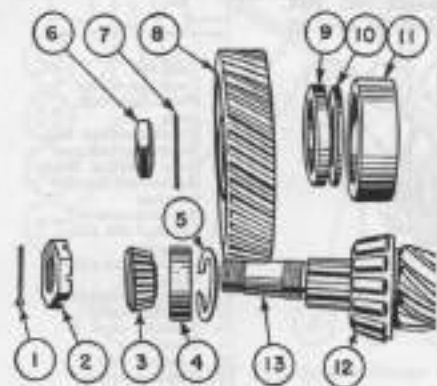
Reduction gear and pinion shaft—Models 20, 20K, 22, 22K, 81 and 82.
